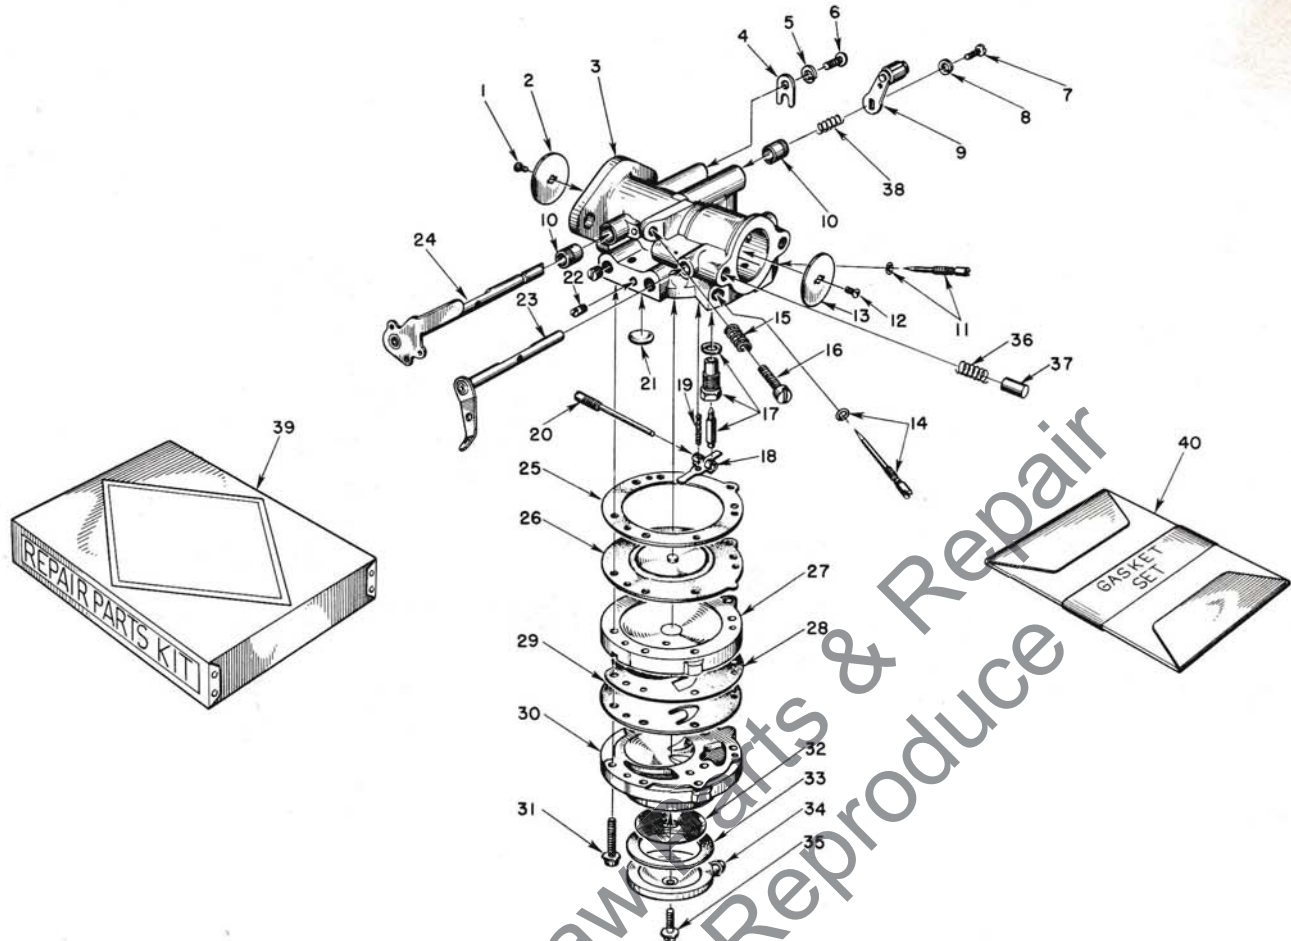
TILLOTSON CARBURETOR PARTS
